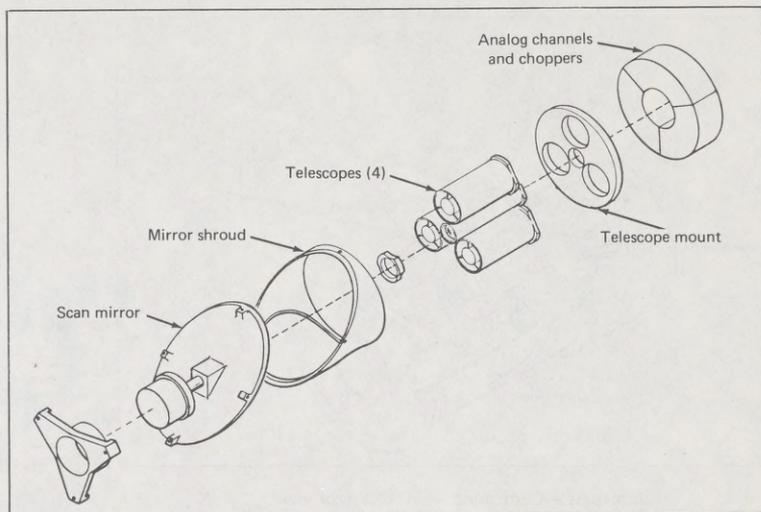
Orbiter IRTM layout. (a) Exploded view.
